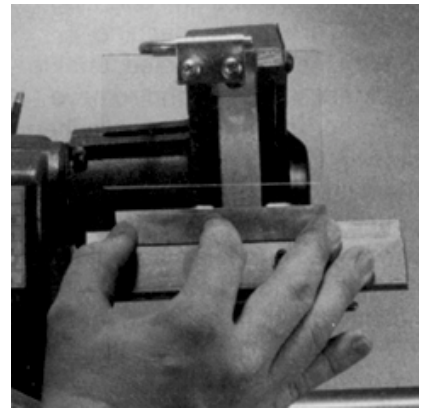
Hold the jointer knife with one hand while sliding it back and forth across the wheel.
